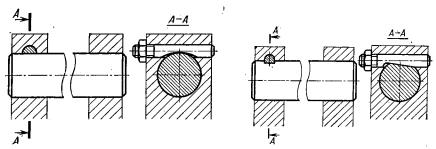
Pivot pin clamped by bolt with cylindrical recess
